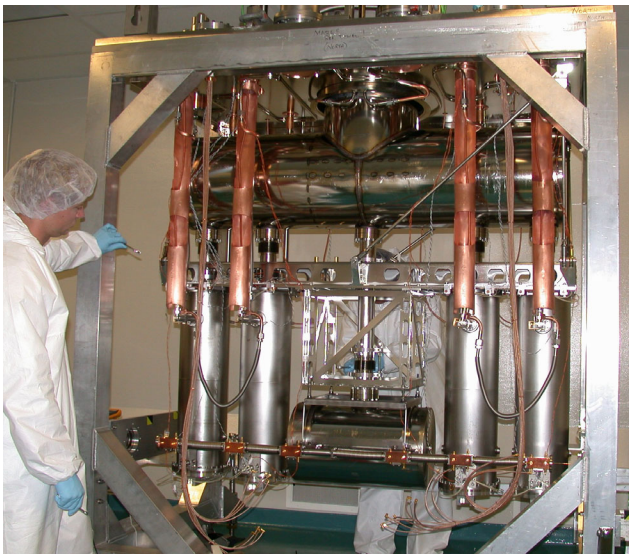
Cryomodule top assembly in the assembly frame prior to the cold test.
